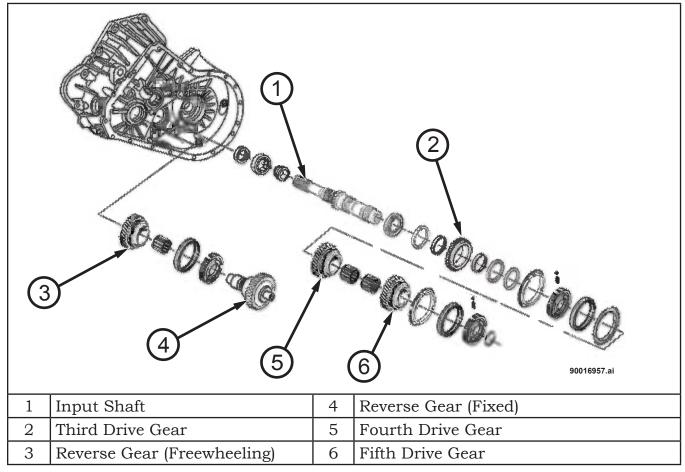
G288 Input and Reverse Idler Shafts Disassembled View
